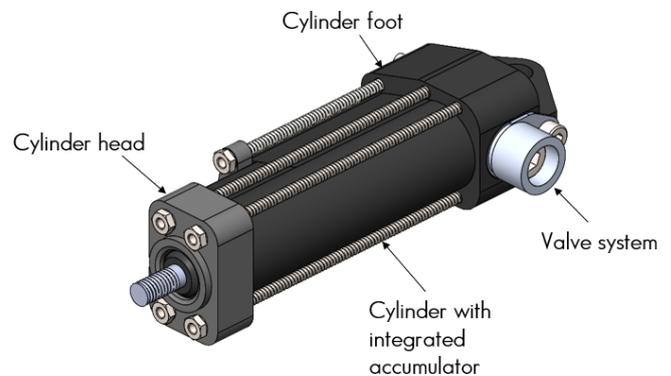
CAD-model of the 3D-printed hydraulic cylinder with annotation of the main components.
